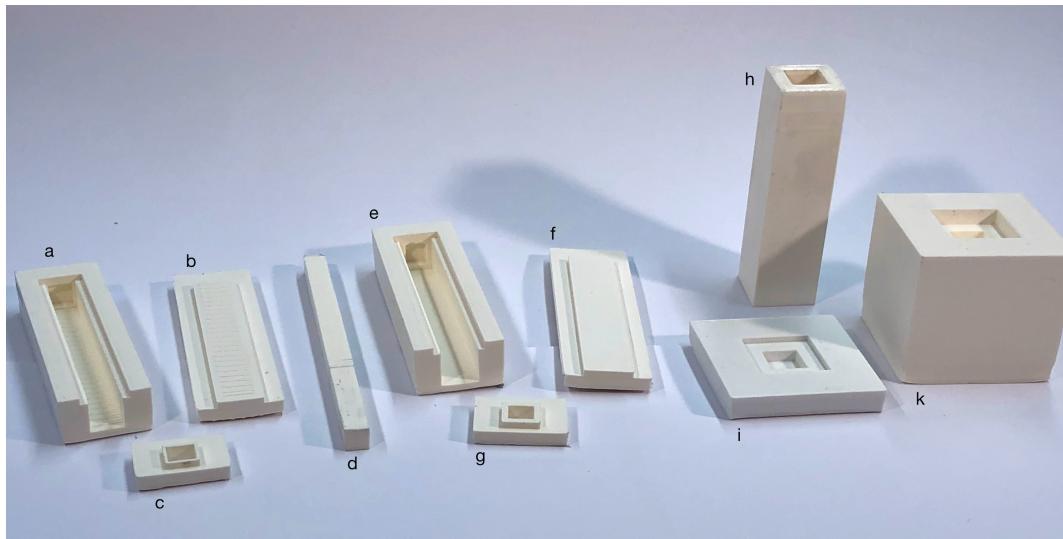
The mold parts shown in Figure 3.5 printed with the Ultimaker S5.
